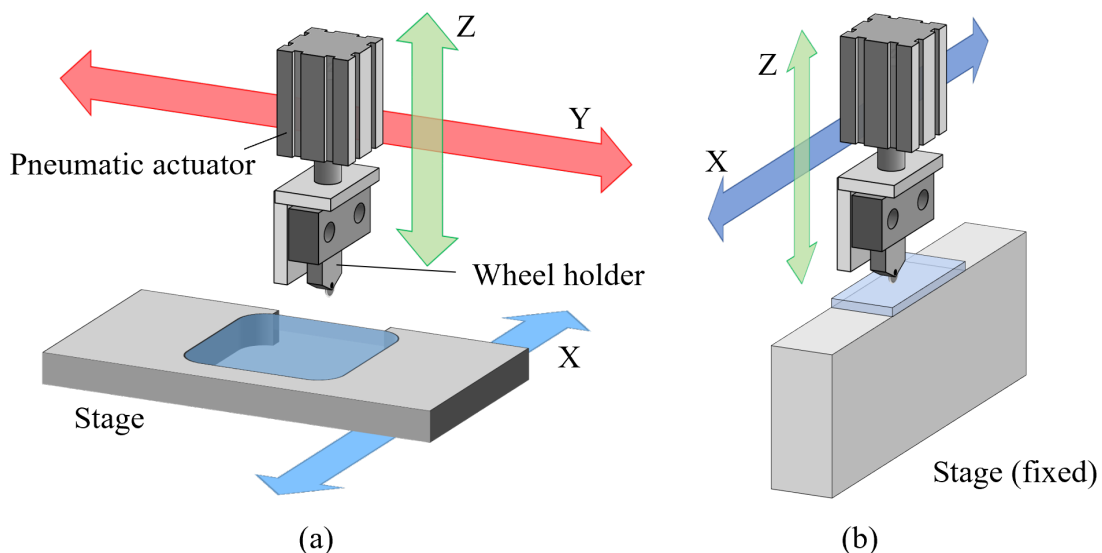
Schematic illustration of scribing machines. (a) shows scribing system of MM9050A2. Stage move toward X direction for scribing. (b) shows Tool Edge Inspection Machine scribing head move toward X direction.
